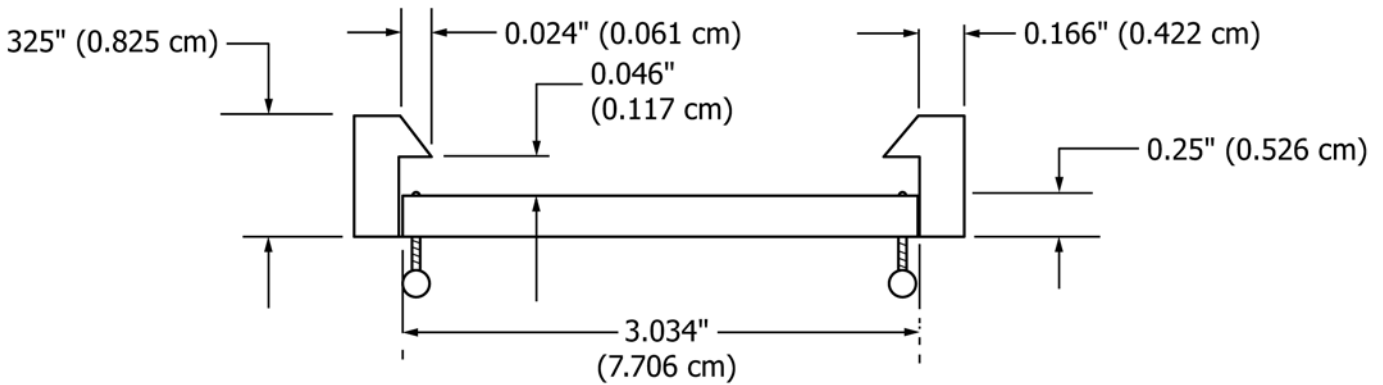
Holding Fixture for 0.04 Steel Suitable for a Sample Width of 3.034 in. (7.706 cm)
